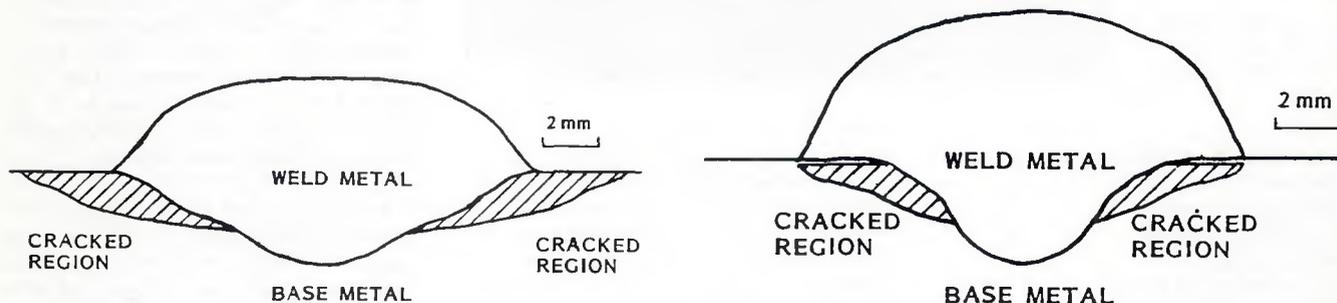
Shape of cross-section of weld bead and transverse crack. A—In the case of 4043 filler metal; B—in the case of 5356 filler metal.
